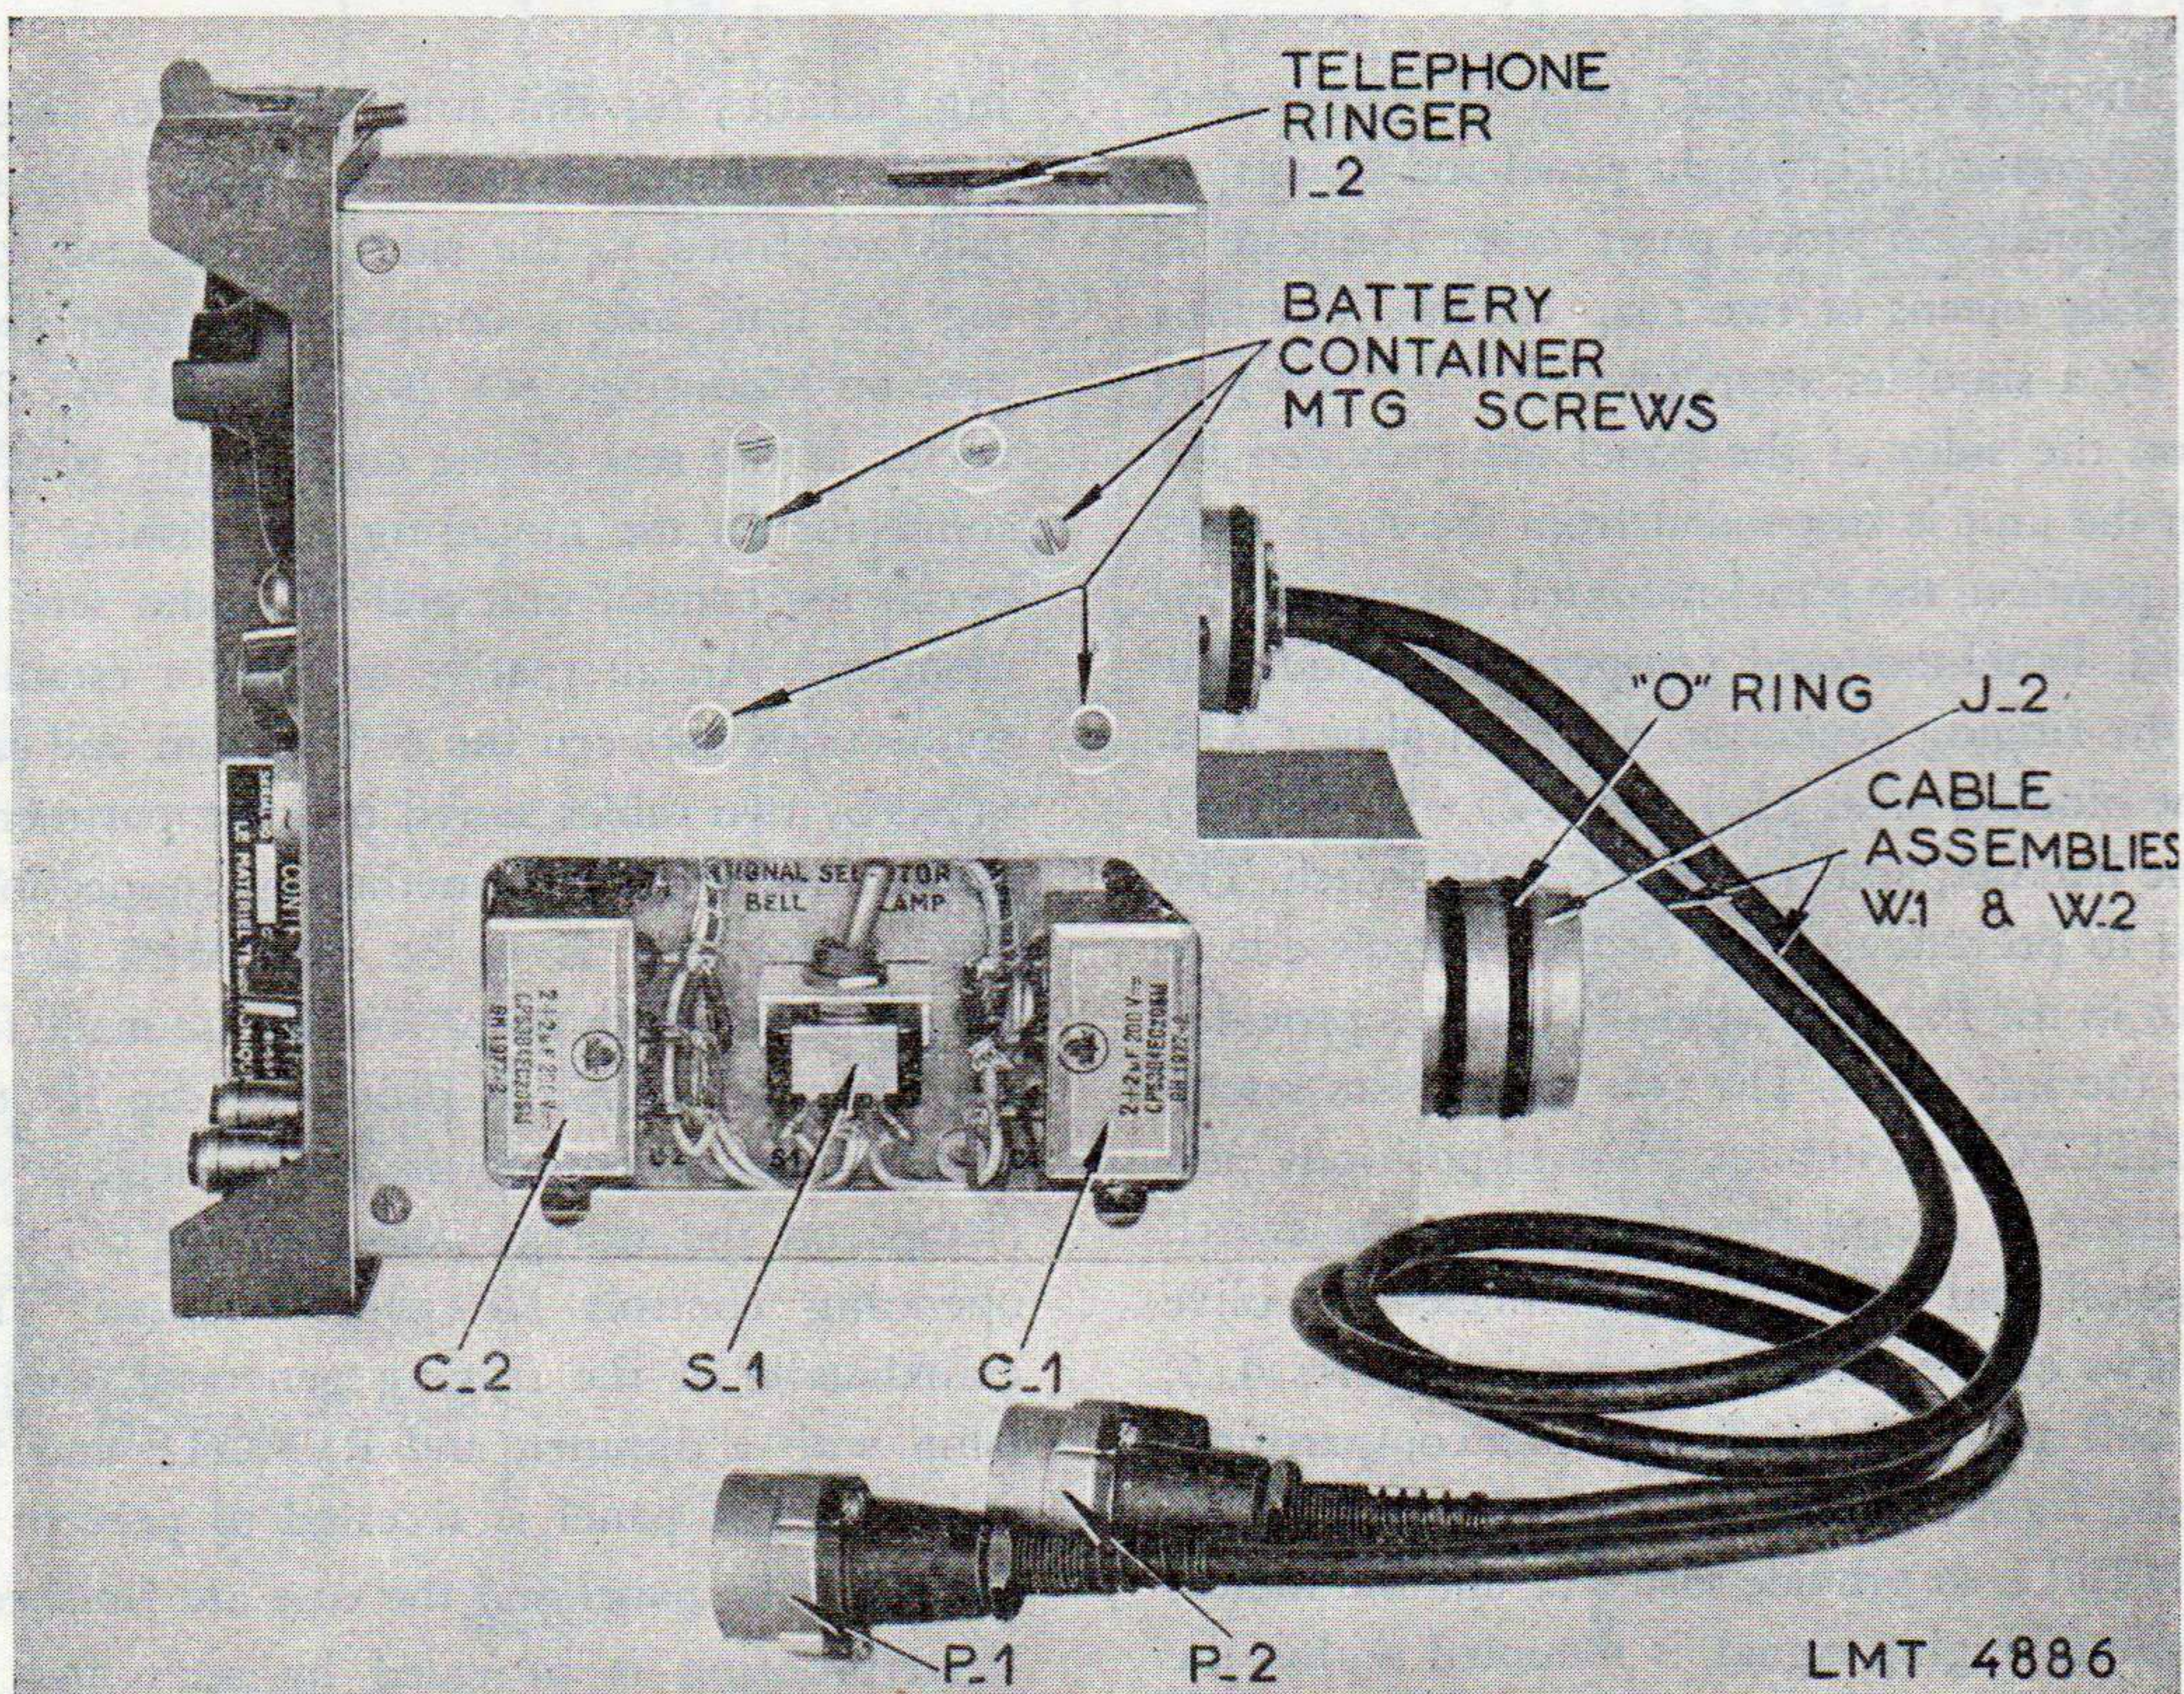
Local Control C-434/GRC, panel-and-chassis assembly, cover removed, top view of chassis.
